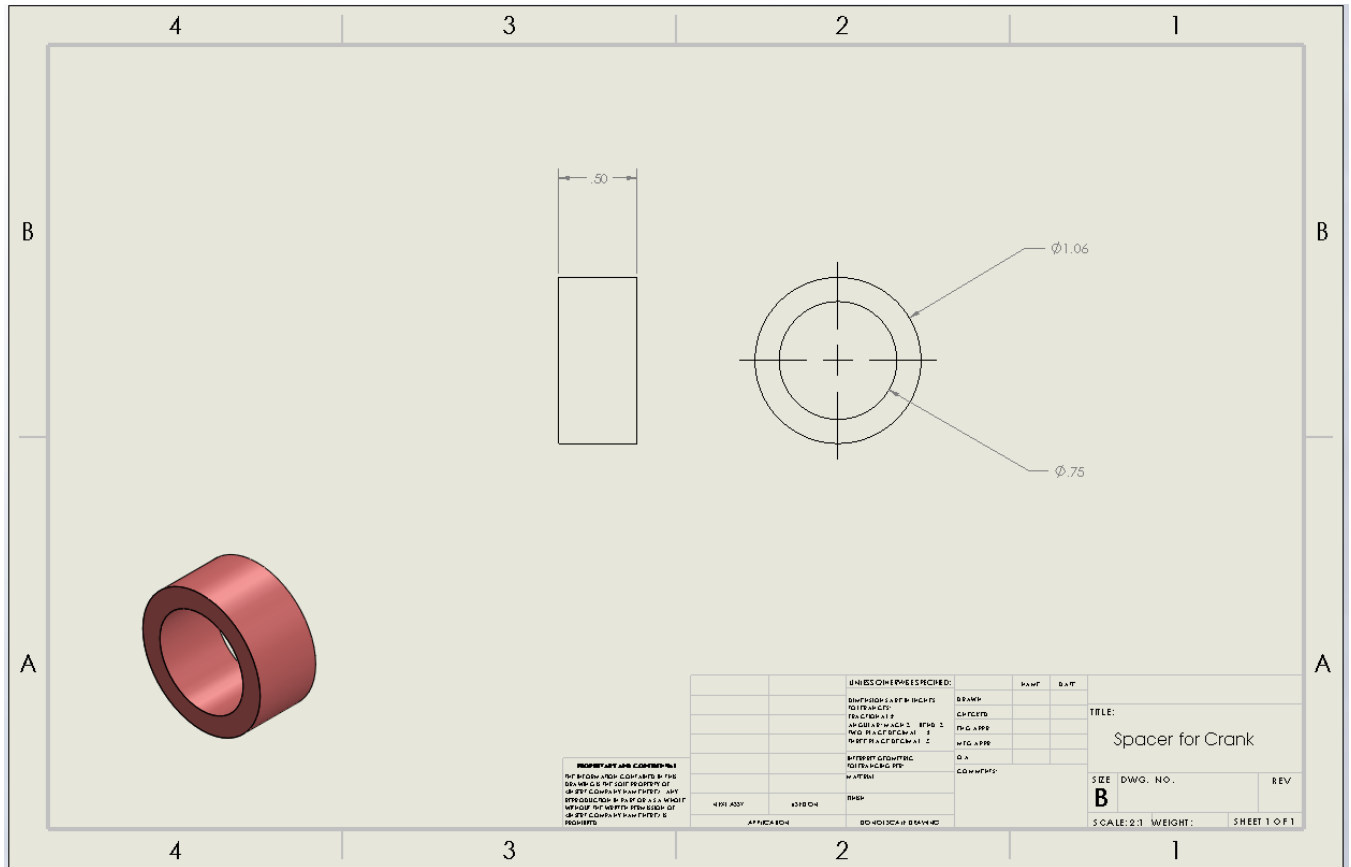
Spacer for Crank Shaft in 3/4-Inch PVC Fitting Engineering Drawing
